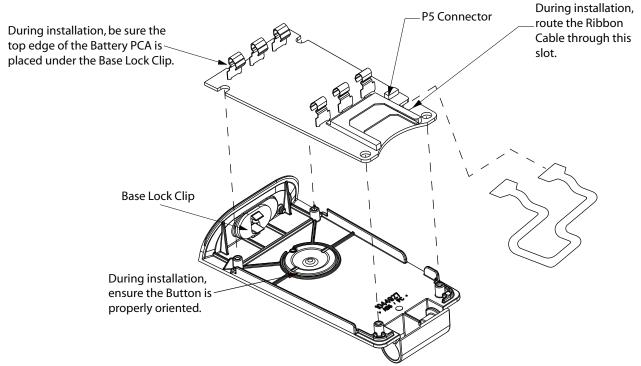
FIGURE D: BATTERY PCA REMOVAL/REPLACEMENT (ENTIRE CLAMSHEELL ASSEMBLY NOT SHOWN)
